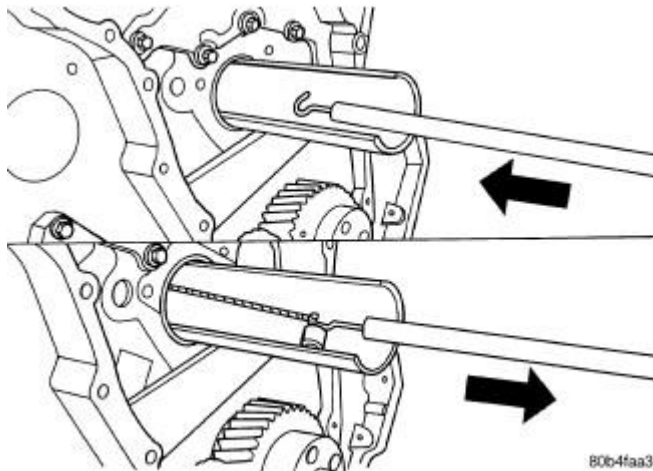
Retrieve Tappet Installation Tool Through Cam Bore
